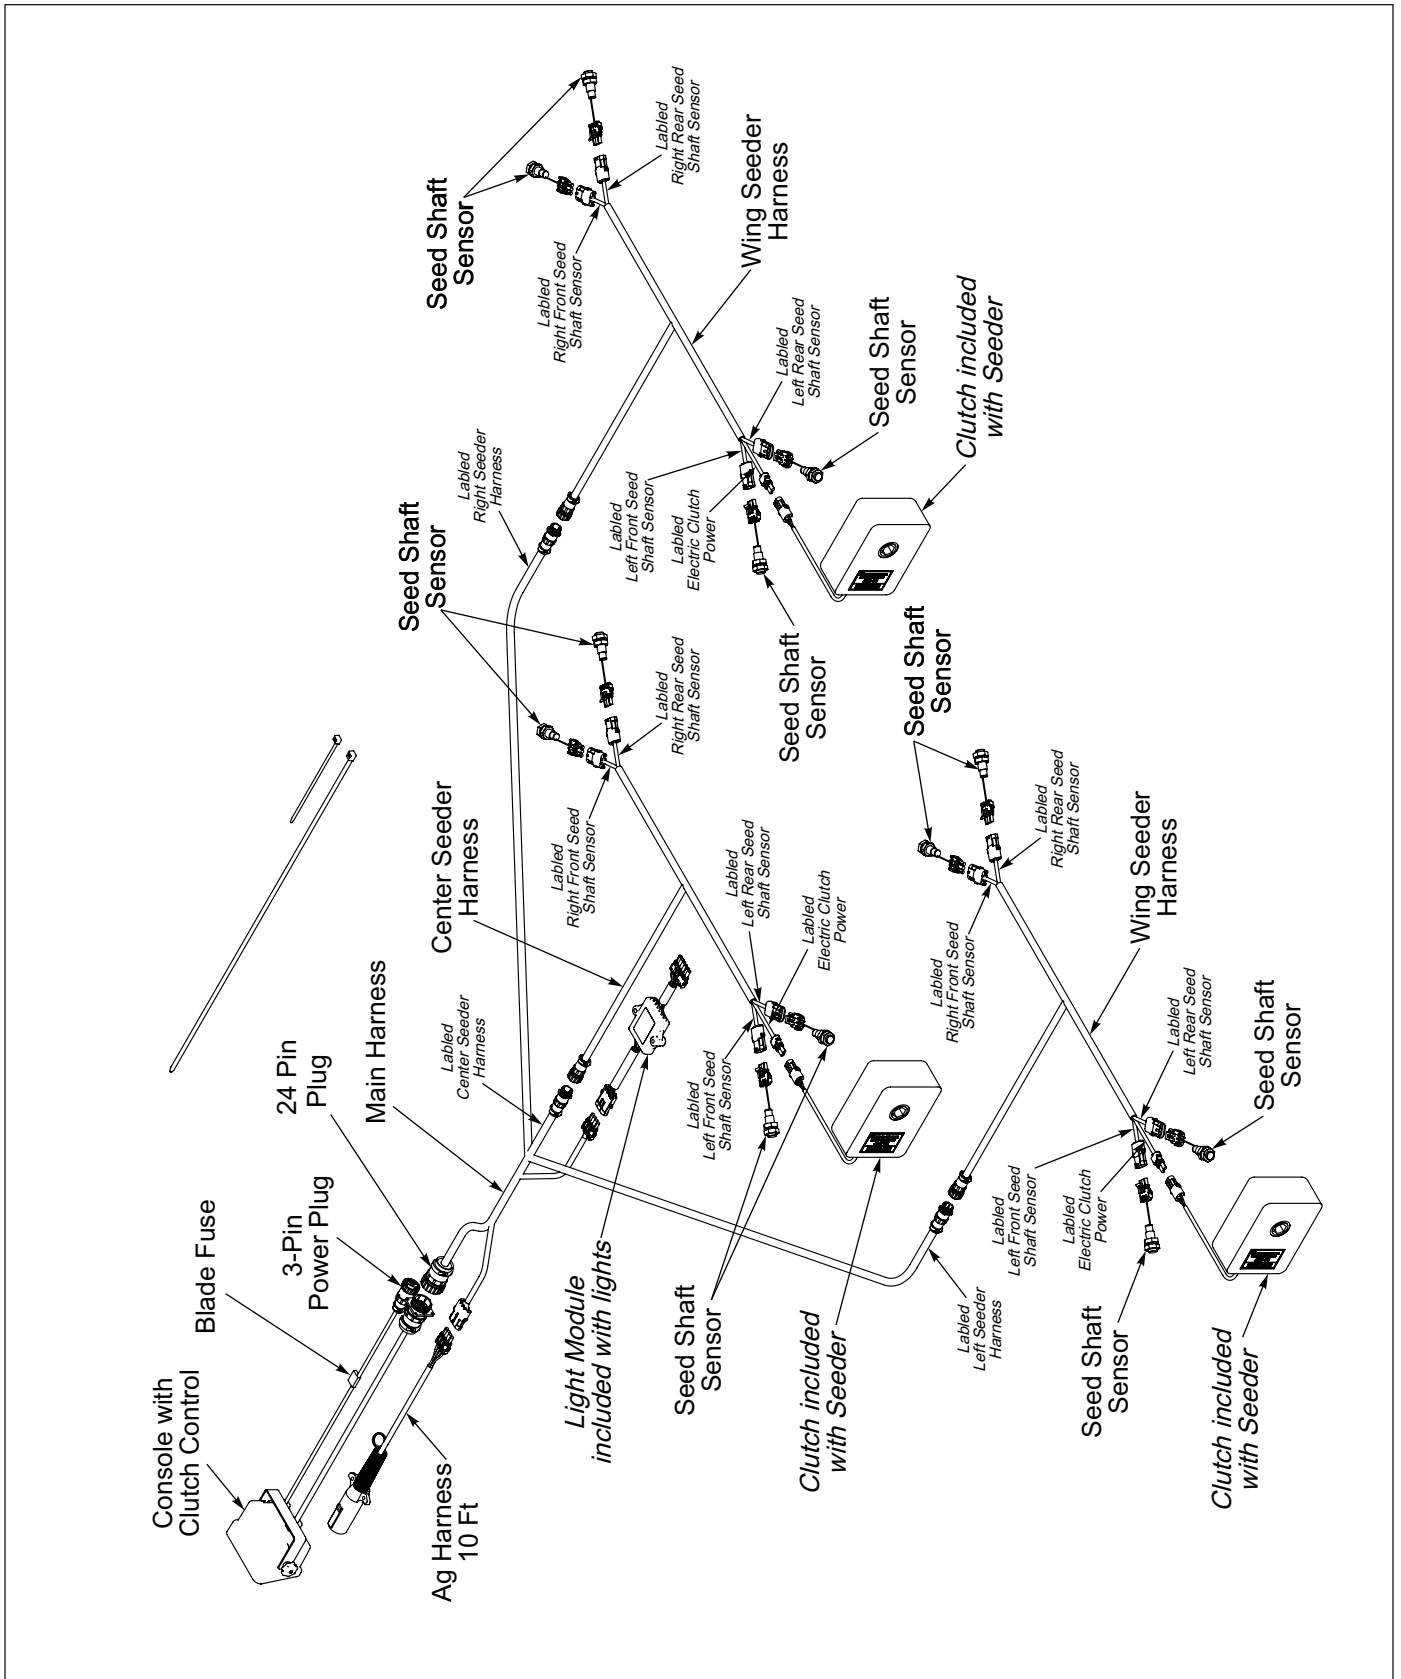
Console w/Clutch - Double Box Sensor Schematic
